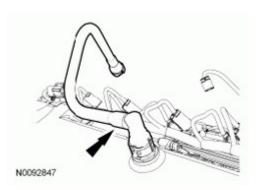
Locating Crankcase Ventilation Tube Courtesy of FORD MOTOR CO.
